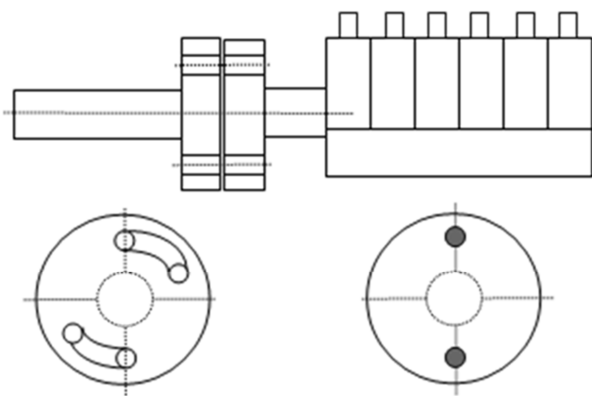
Changing the timing of fuel injection by rotating the driven shaft of the high-pressure pump [31]
